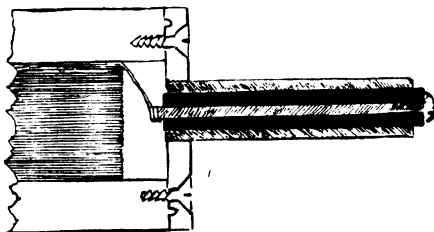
Section of front spindle, showing connection of armature wiring to the insulated central rod and stud.
